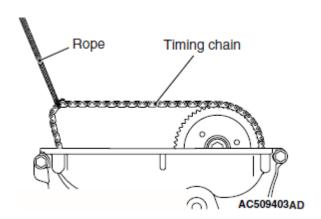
Removing Timing Chain From Camshaft And Camshaft Sprocket Assembly (Exhaust Side)
